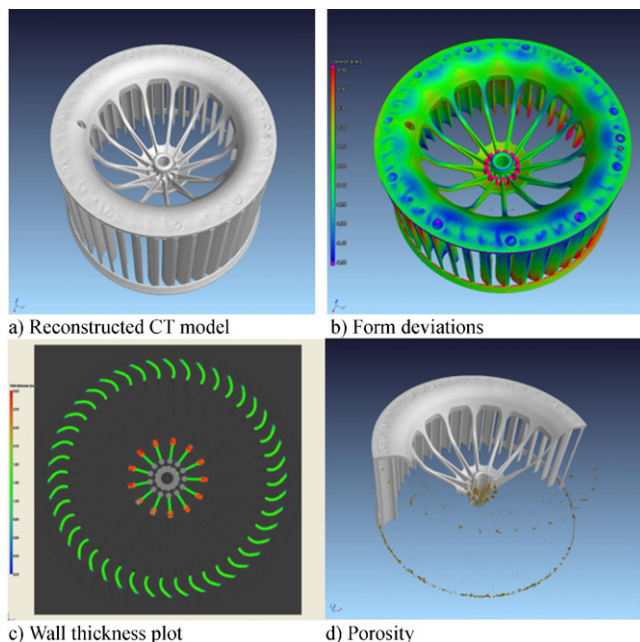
Car inlet fan: geometric (b and c) and material (d) control.
